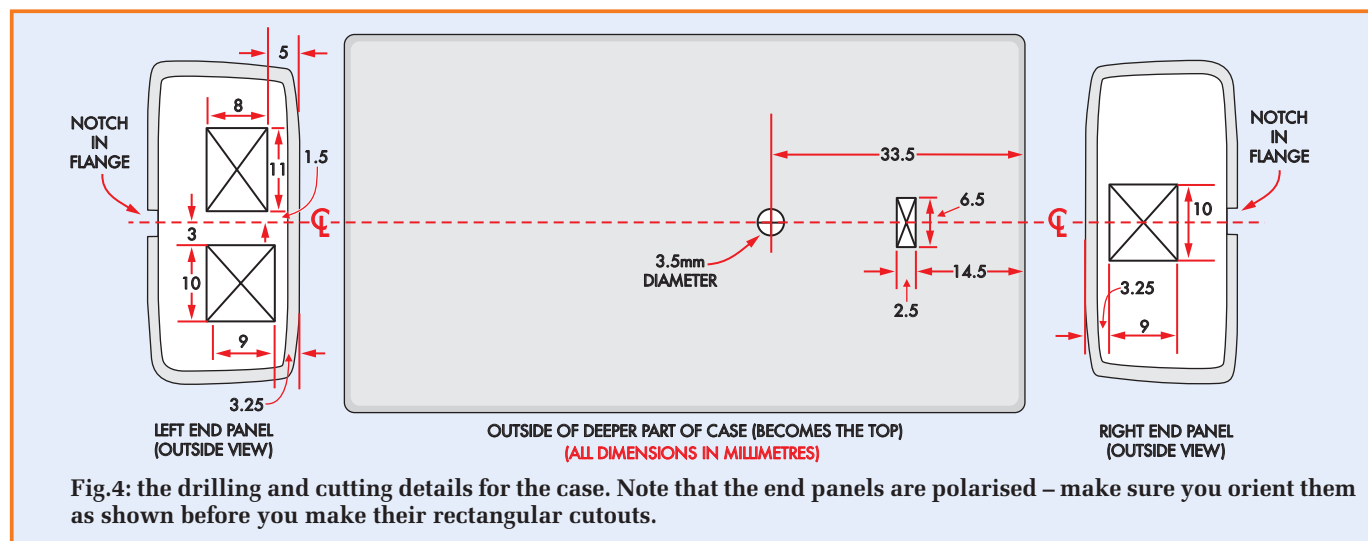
the drilling and cutting details for the case. Note that the end panels are polarised – make sure you orient them as shown before you make their rectangular cutouts.
